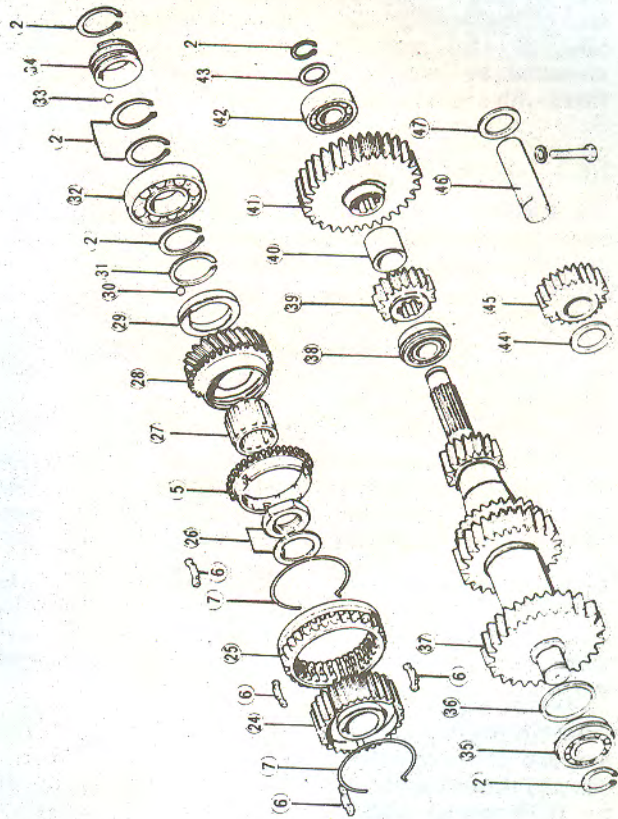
Exploded view of the gearwheels and shafts fitted to the five speed transmission.
